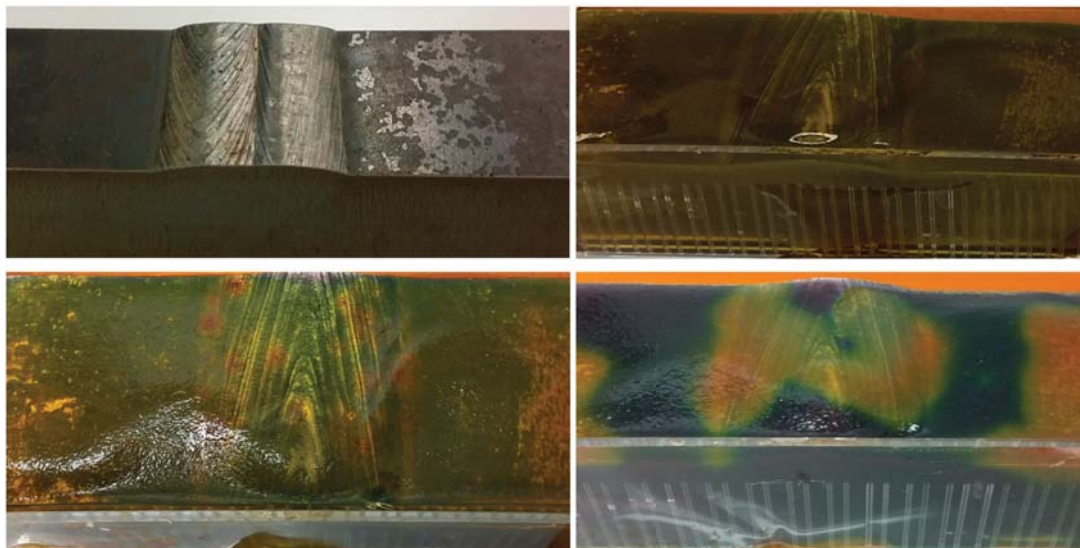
Accelerated corrosion test of butt welded joint with agar gel
